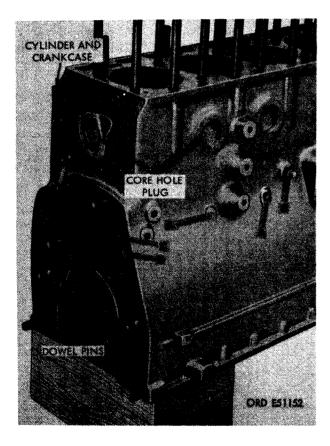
REMOVING OR INSTALLING CYLINDER AND CRANKCASE PIPE PLUGS - RIGHT REAR VIEW.
